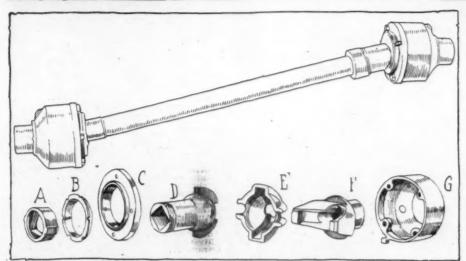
PARTS OF FEENY UNIVERSAL AND COMPLETE DEVICE ASSEMBLED ON SHAFT
